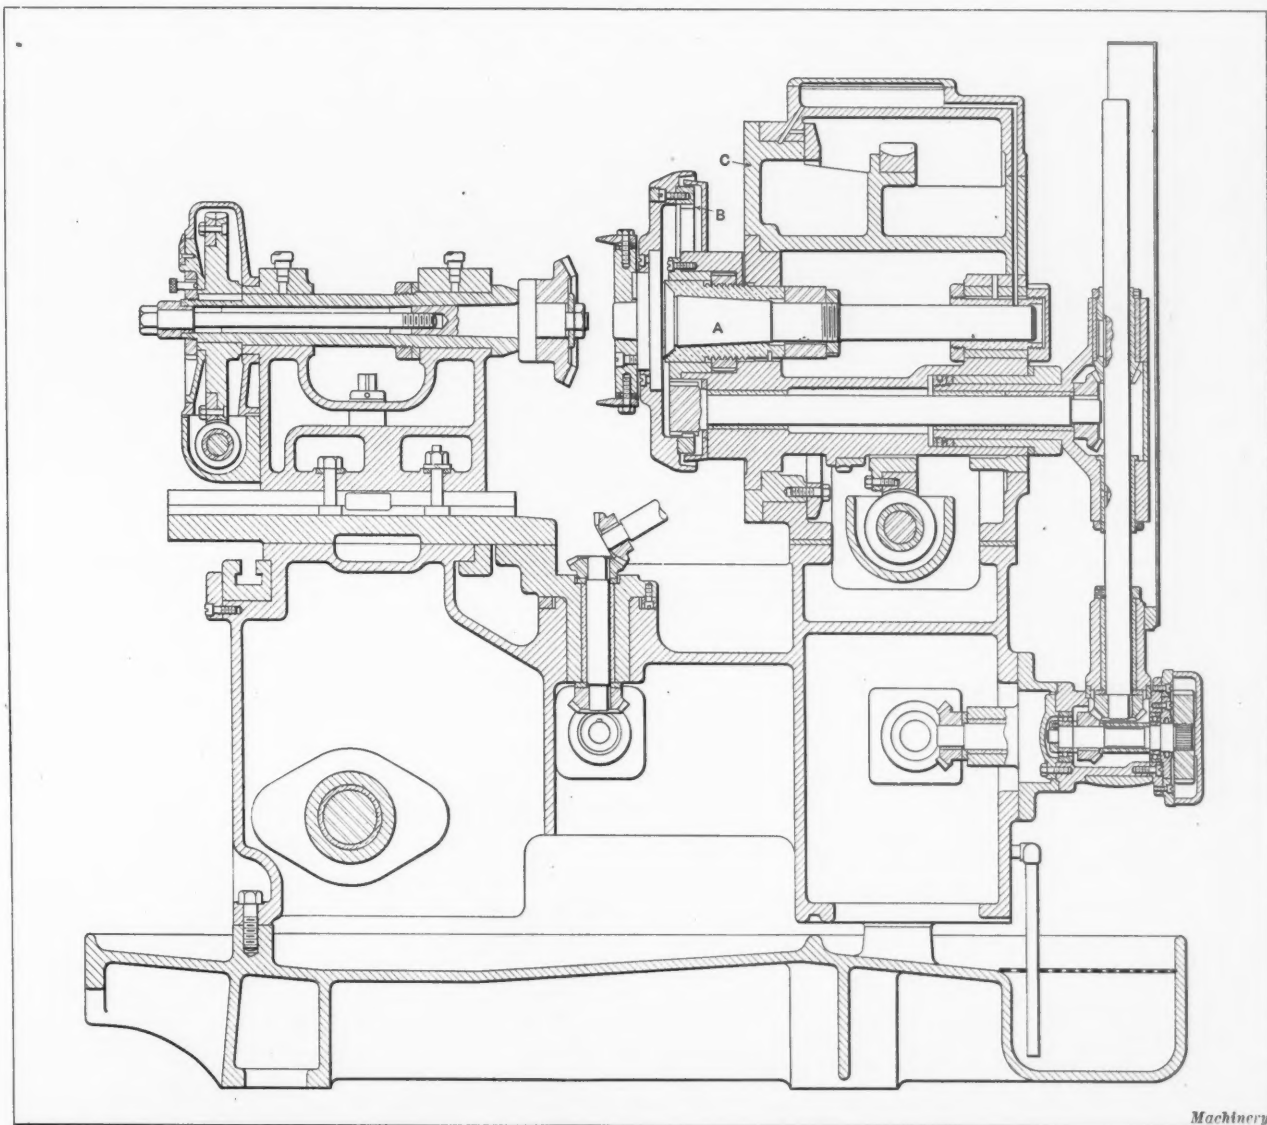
Cross-sectional View of Gleason Spiral Bevel Gear Generator, showing Manner of Driving
